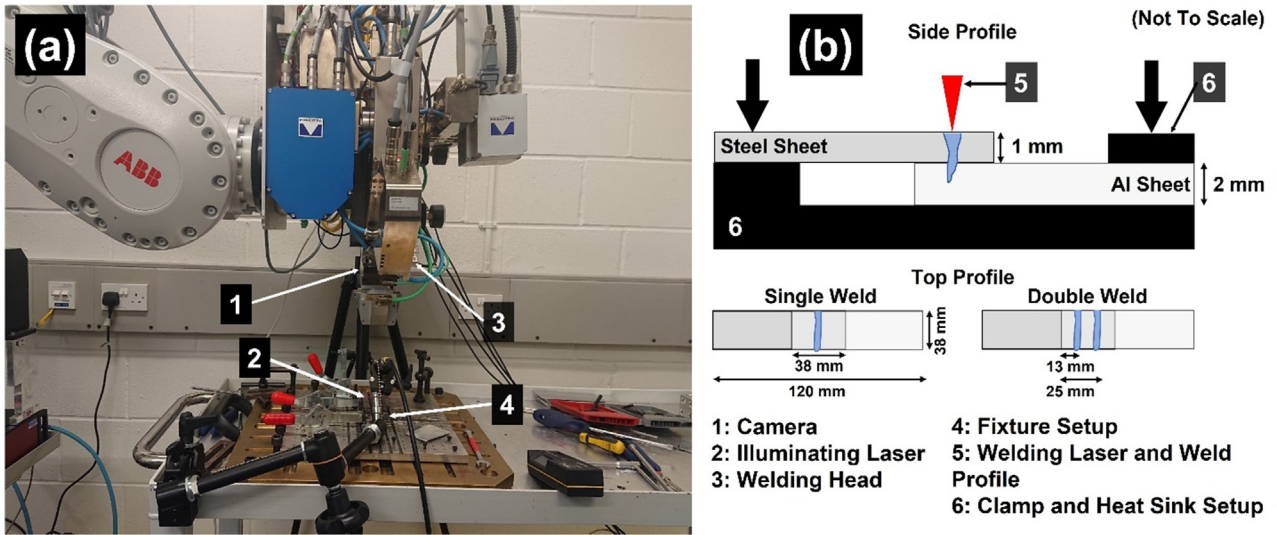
Experimental set up: (a) photograph of the setup for the RLW trials and (b) a schematic of the setup used for the RLW welded coupons (Steel-Al) and lap-shear test specimens with a single weld and double weld. (Schematic is not to scale).
